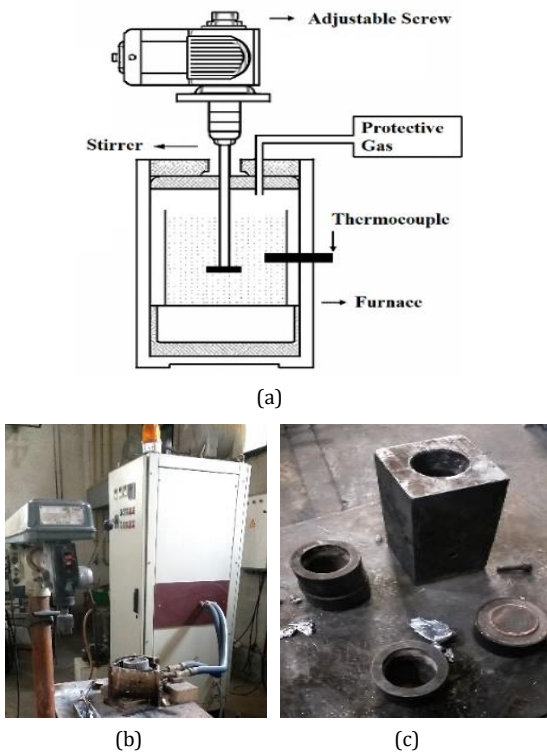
(a) Schematic of the casting system employed; (b) Induction melting system; (c) Casting mold.
